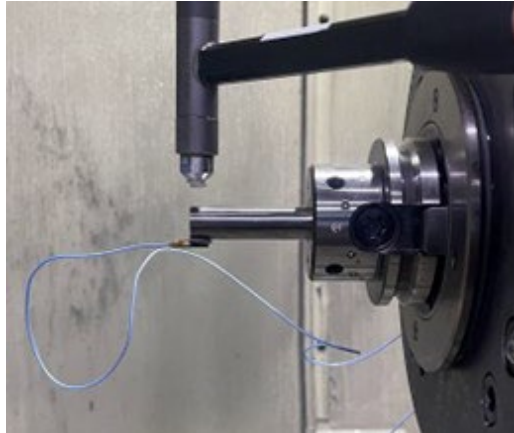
Tool-holder-spindle-machine receptances were measured by impact testing using a modal hammer and low mass accelerometer to determine the tool-holder coupling parameters.
